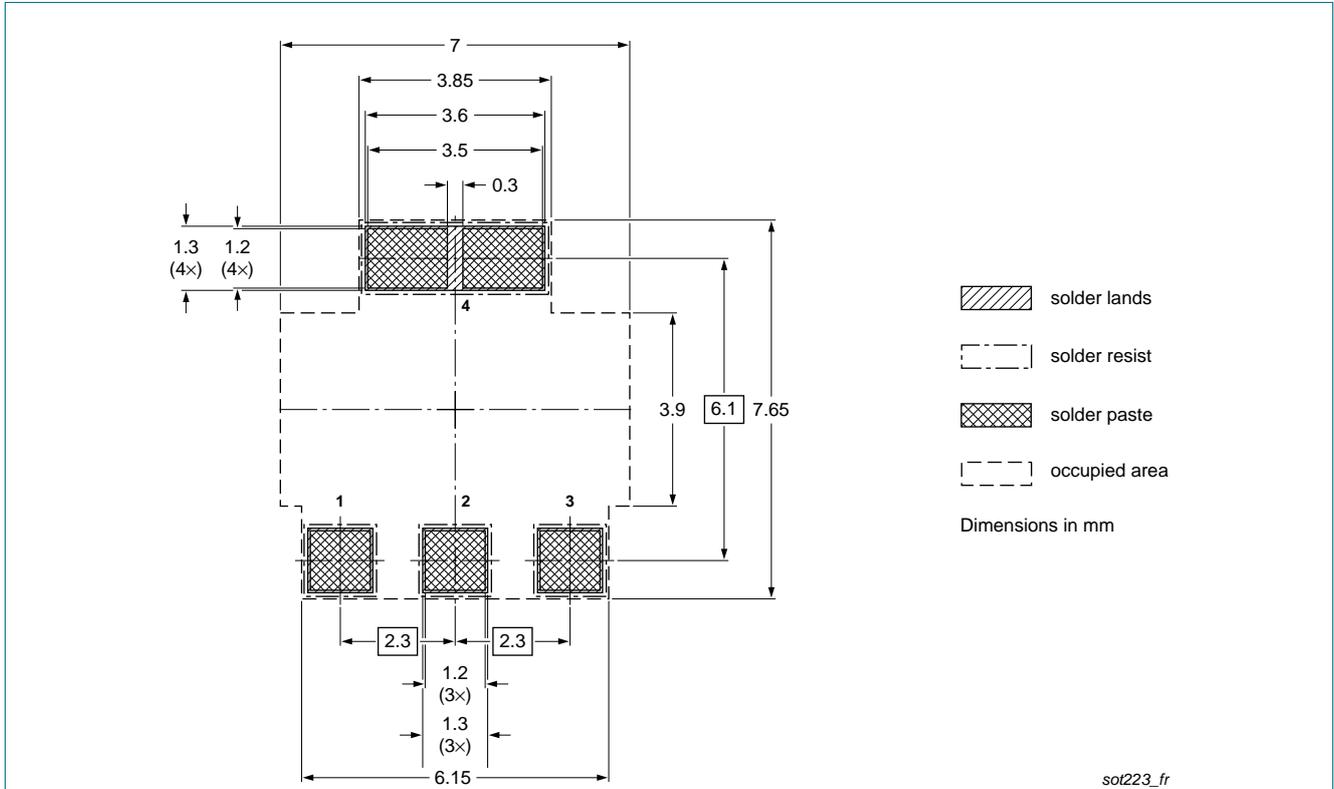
Reflow soldering footprint SOT223 (SC-73)
